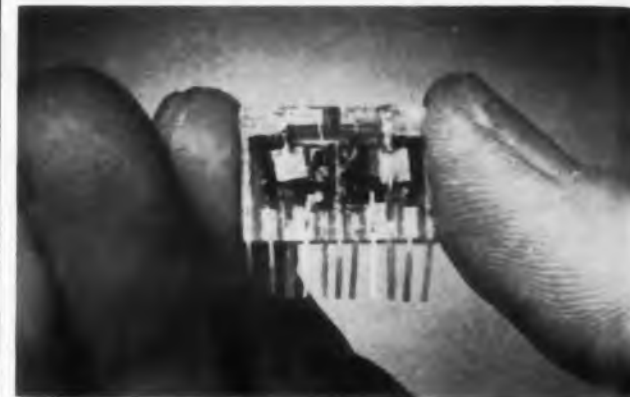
Hamilton Standard's wafer, containing a complete flip-flop, is assembled by electron-beam welding techniques.
